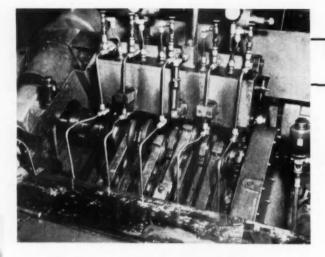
Looking down on the secondary crankshaft and the rear portions of the rods that connect this shaft with the master shaft. Also shown is the lubricant tank with piping to bearings.
